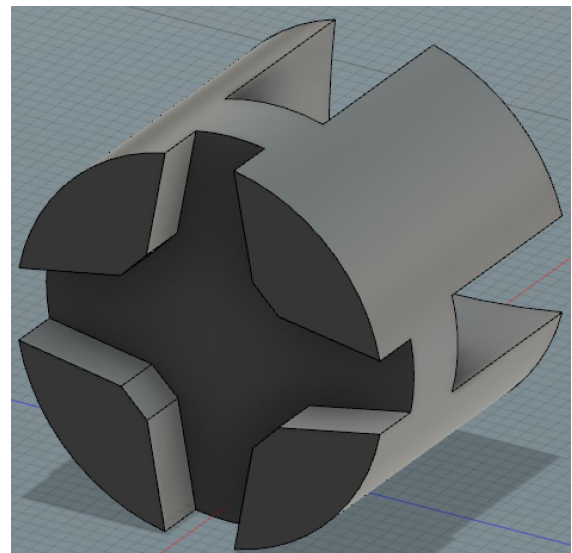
uTune Peg Clip Motor Attachment: Motor Side
